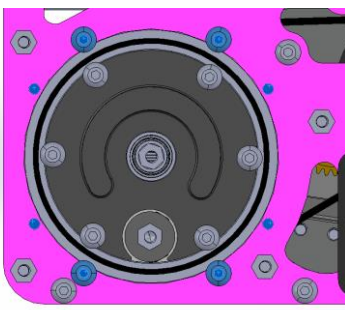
Top view of X-contact bearing fixed with 4 bolts highlighted in blue.
